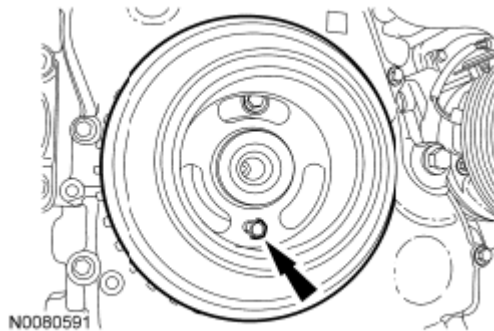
Locating Crankshaft Pulley Hole Bolt (6 mm x 18 mm)
